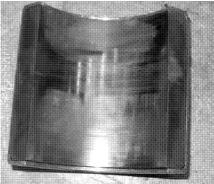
Thrust bearing side journal and pad after the 2nd phase of tests
